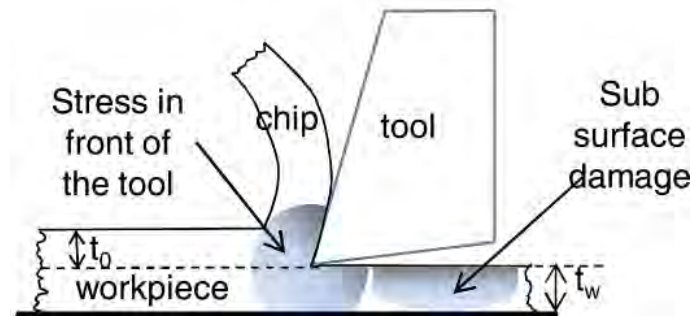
Tool and workpiece interface (Saptaji, 2013)
